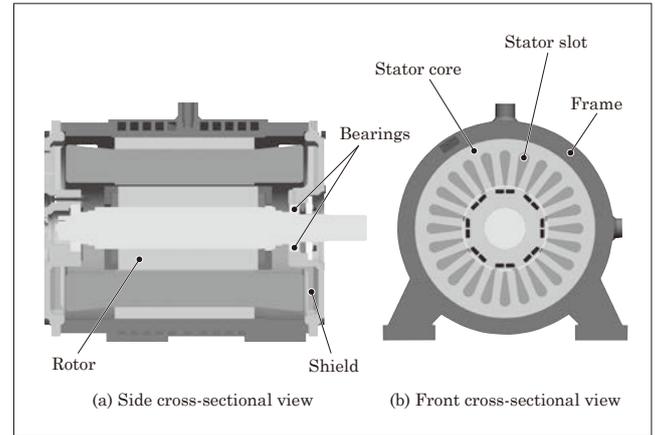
Structural cross-sectional view of PM motor for fluid apparatus
